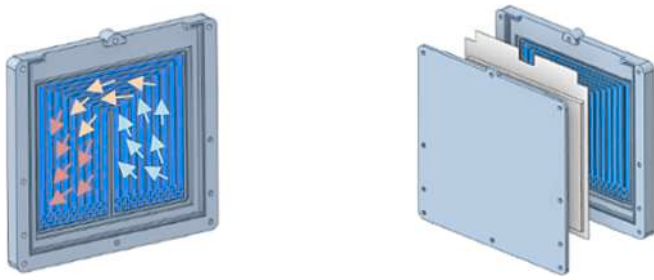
U-shape channels developed by M. Larrañaga et al. [22].
